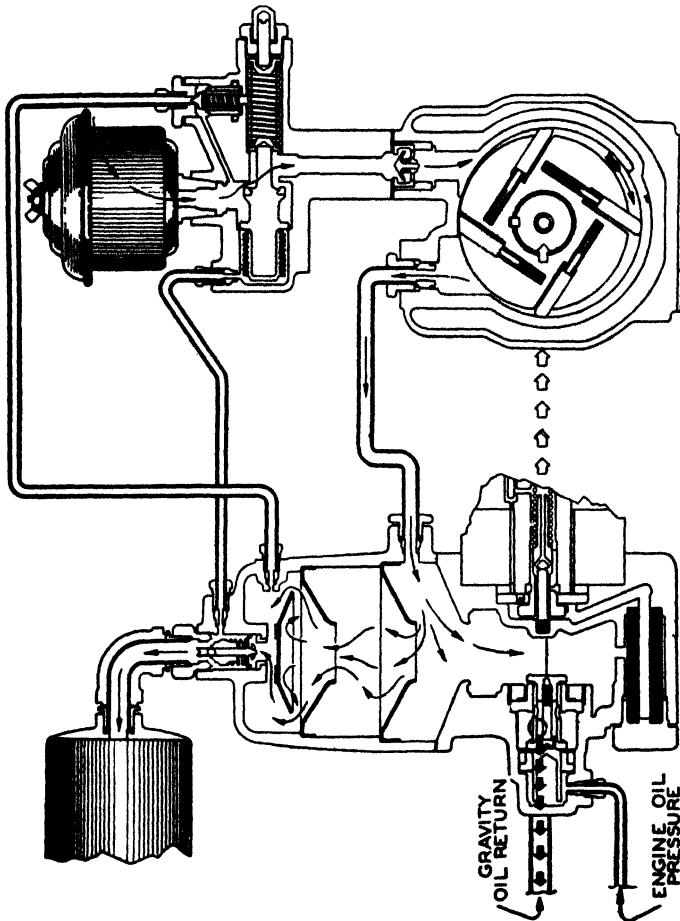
SCHEMATIC DRAWING OF WAGNER COMPRESSOR SYSTEM.
